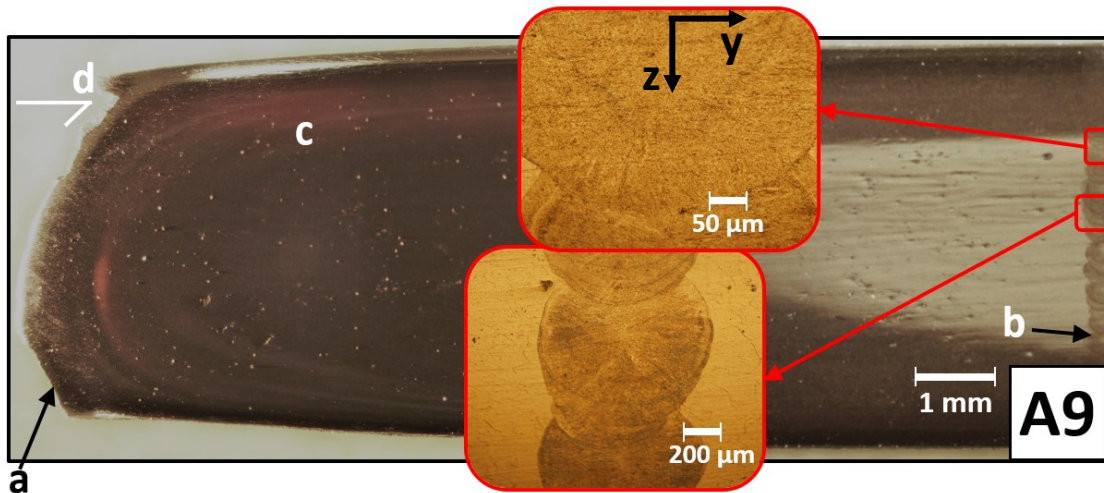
Sample A9 (180.4 J/mm) fractured outside the weld zone showed no defect in the microstructure of the weld zone when viewed by optical microscope after etching. a: fracture zone, b: weld bead, c: base metal, d: ductile fracture at 45° to the loading direction
